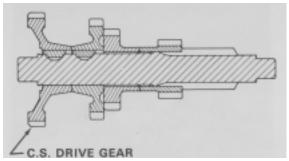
Install drive gear key in countershaft key slot. With hub of gear as shown, align drive gear keyway with key in countershaft. Press gear on shaft.
